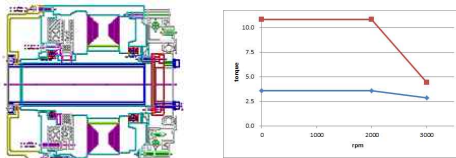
Drawing and T-N curve of 0.75kW Hollow shaft motor
